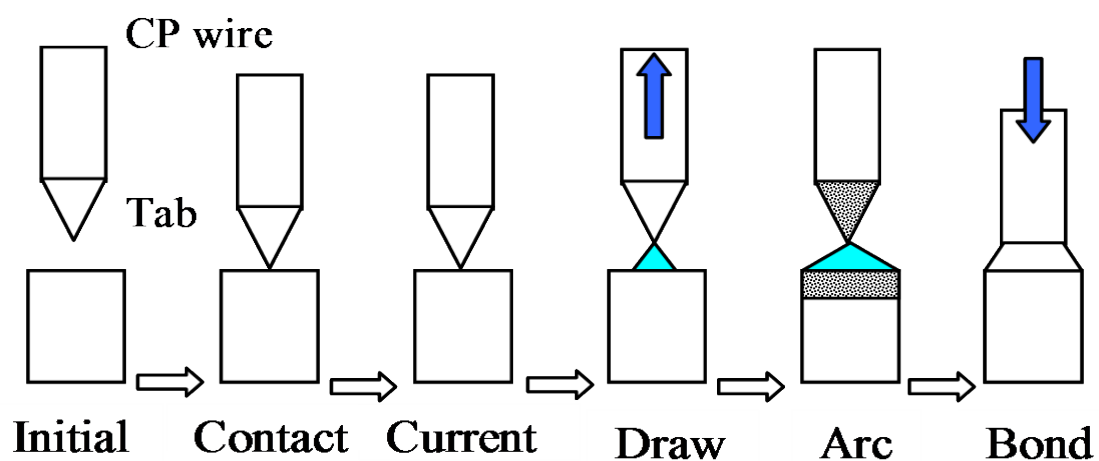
Arc stud welding process for CP wire in argon gas shield.
